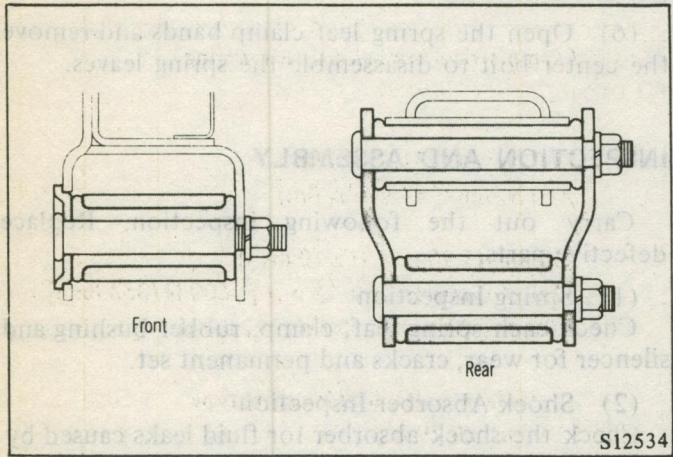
Assembling the Spring Front and Rear Eye Bushings
